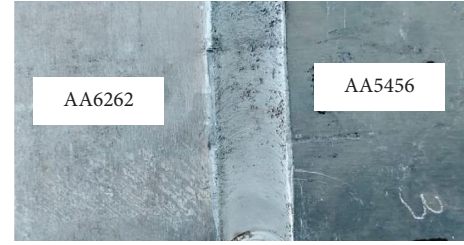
Friction welded joint on AA6262 and AA5456.
